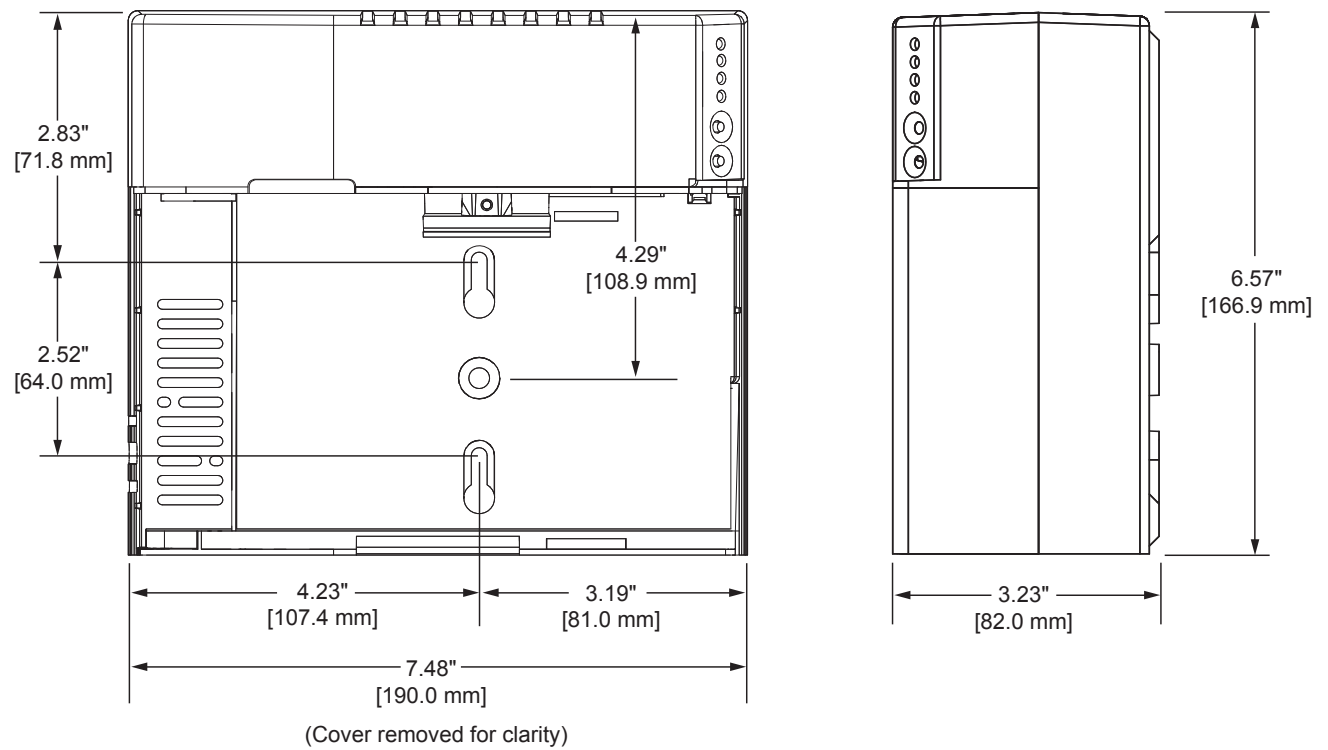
, Unit Dimensions (in/[mm]), FlexPoint Unit
